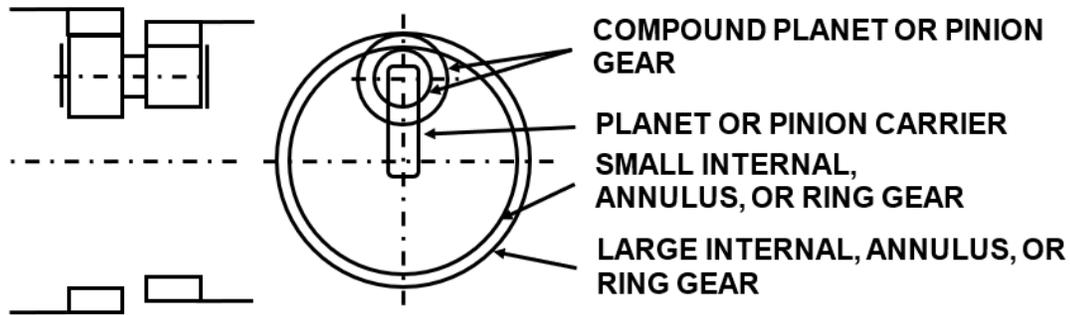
Compound internal planetary arrangement, dual ring, stepped planet
